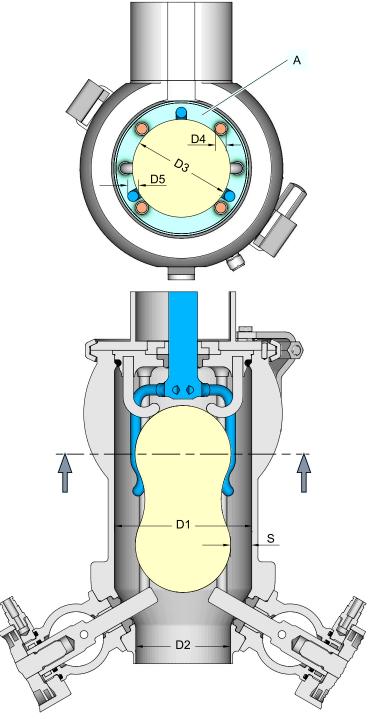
The free cross-sectional area (A) at the narrowest point in the pig station housing is > 100% of the pipe cross-sectional area.
